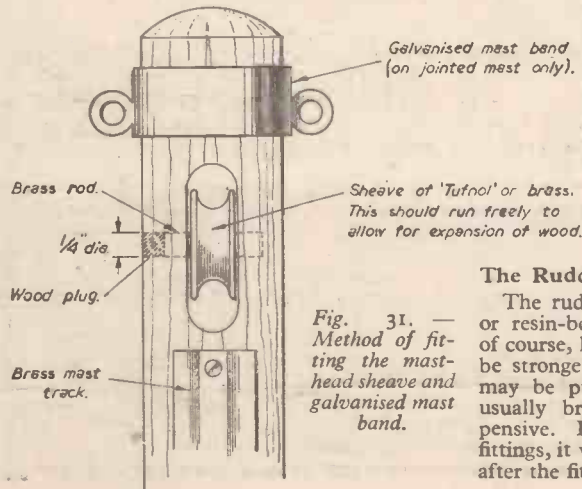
Method of fitting the mast-head sheave and galvanised mast band.
